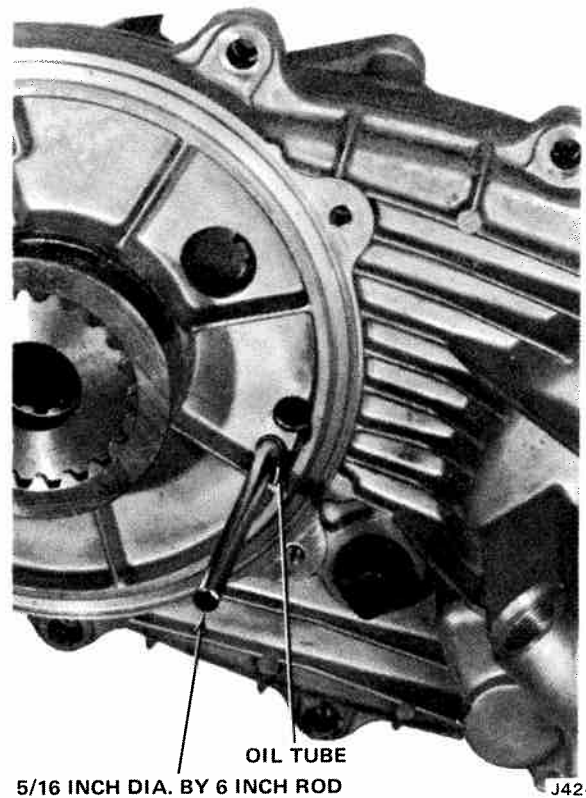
Aligning Oil Tube for Cover Assembly Installation
